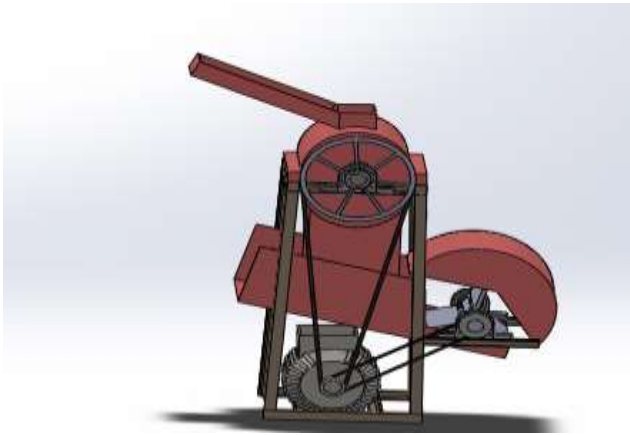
The isometric drawing of the developed groundnut shelling machine
